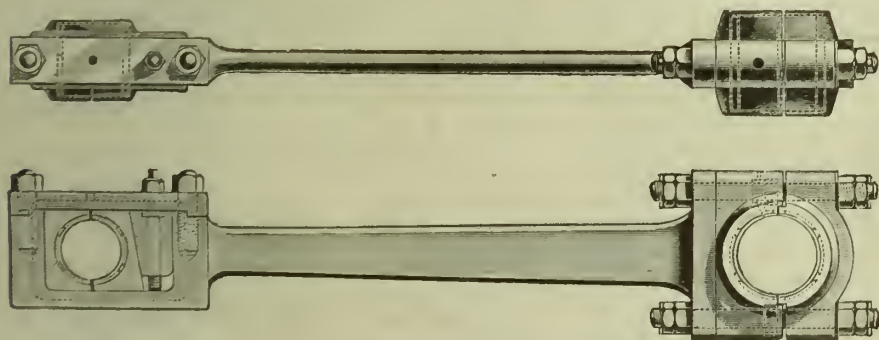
WESTON ENGINE CONNECTING ROD.
